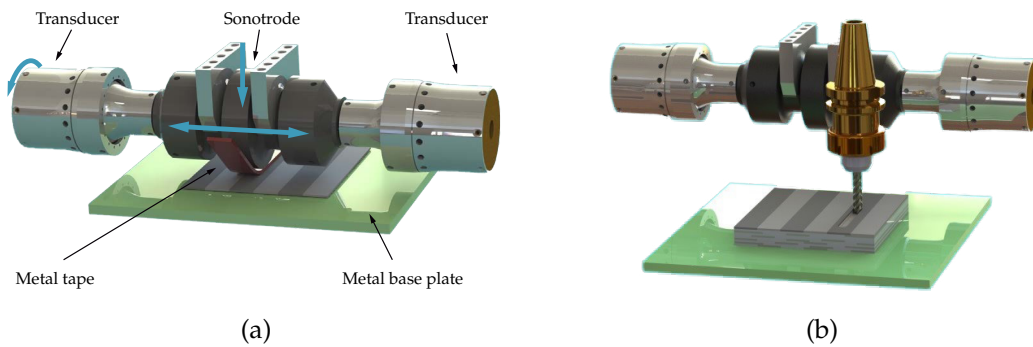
Embedding fibre optic strain sensors into metals using UAM: additive ultrasonic welding stage (a); subtractive computer numerical control machining stage (b) [48]
